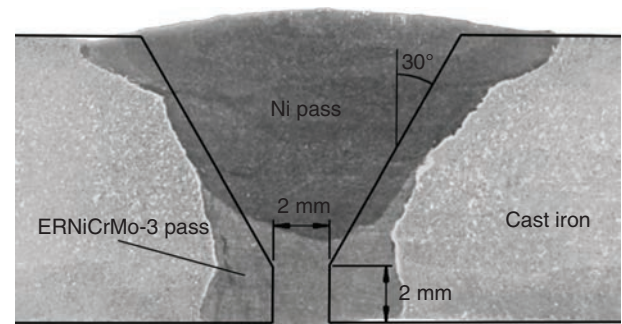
Macrograph of a welded coupon attacked with Nital-3 superposed with the original geometry of the plates. These images were used to obtain dilution values.
